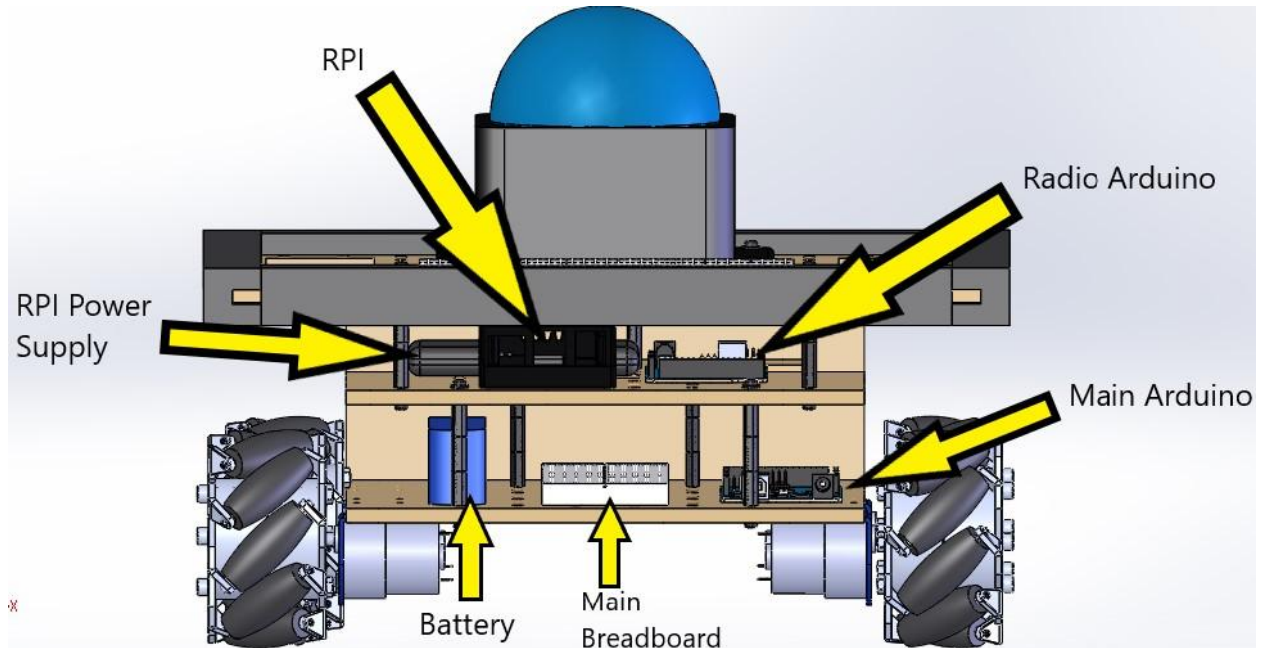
Rear view of assembled robot with arrows indicating locations of electrical components.
